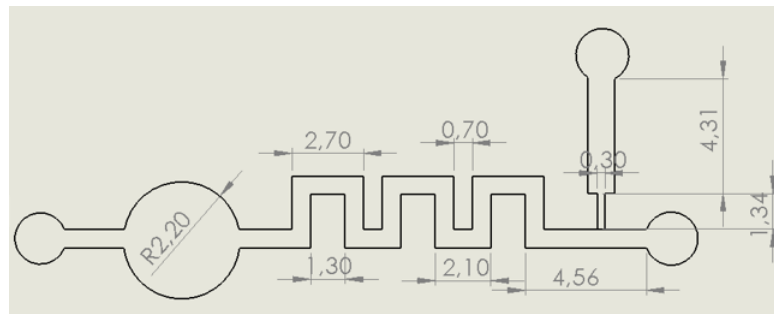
Drawing in SolidWorks of Serpentine Mixer
